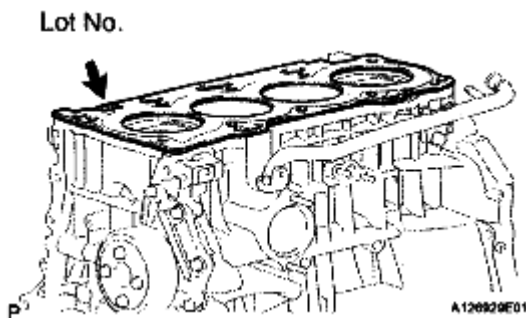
Identifying Cylinder Head Gasket With Lot No.
